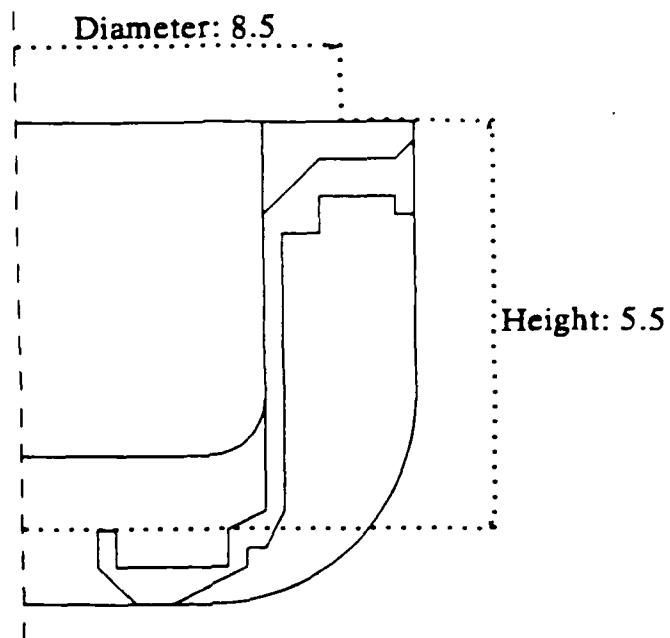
Example Forging Section Designed By AFD (Dashed Line-Machined Part Geometry, Solid Line-Forging Geometry)
